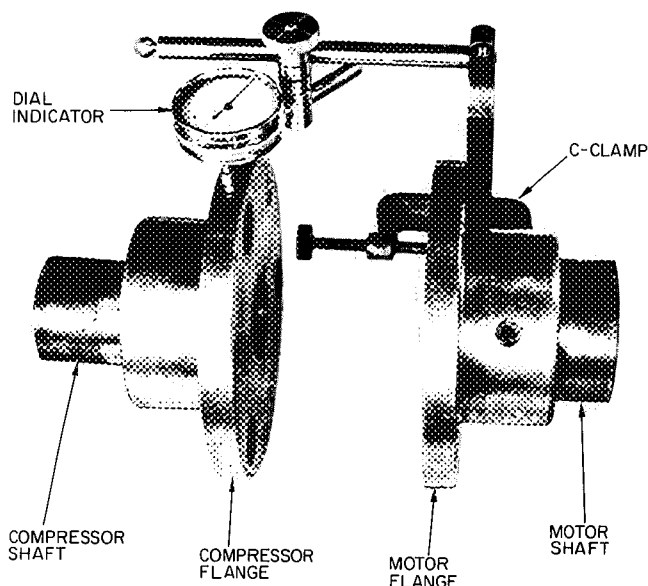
Dial Indicator Set Up to Check Parallel Alignment
